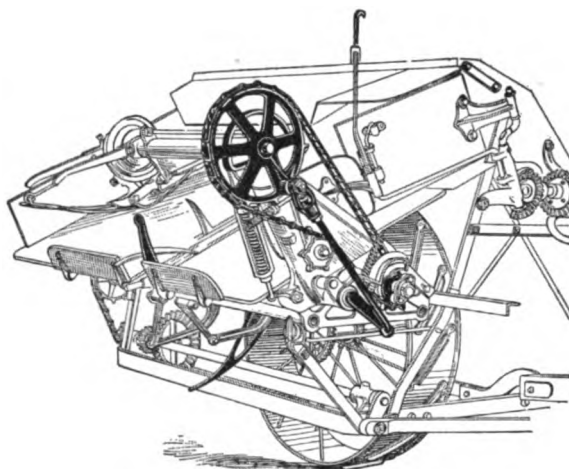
Part of a reaping machine (eccentric wheel at rest) to illustrate the high degree of complexity of modern farm machinery.
